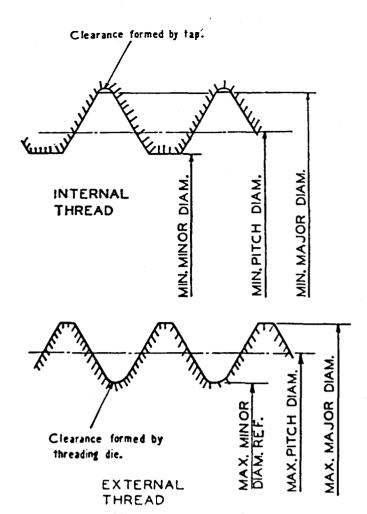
Thread dimensions to be determined for a special thread.
